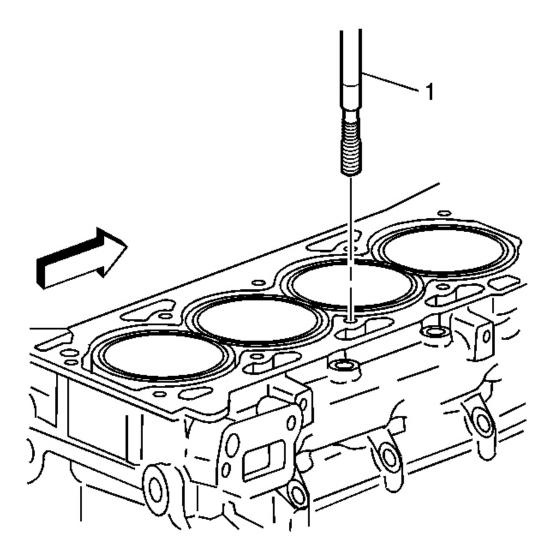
View Of Installation Driver Courtesy of GENERAL MOTORS CORP.
